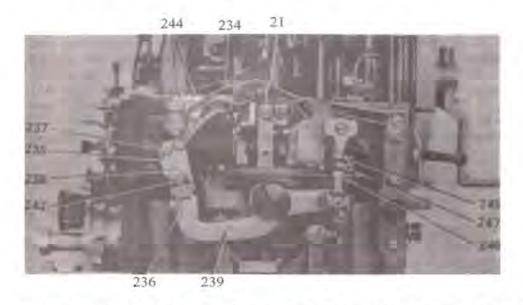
Adjustments on Under Thread and Cord Trimming Mechanism
